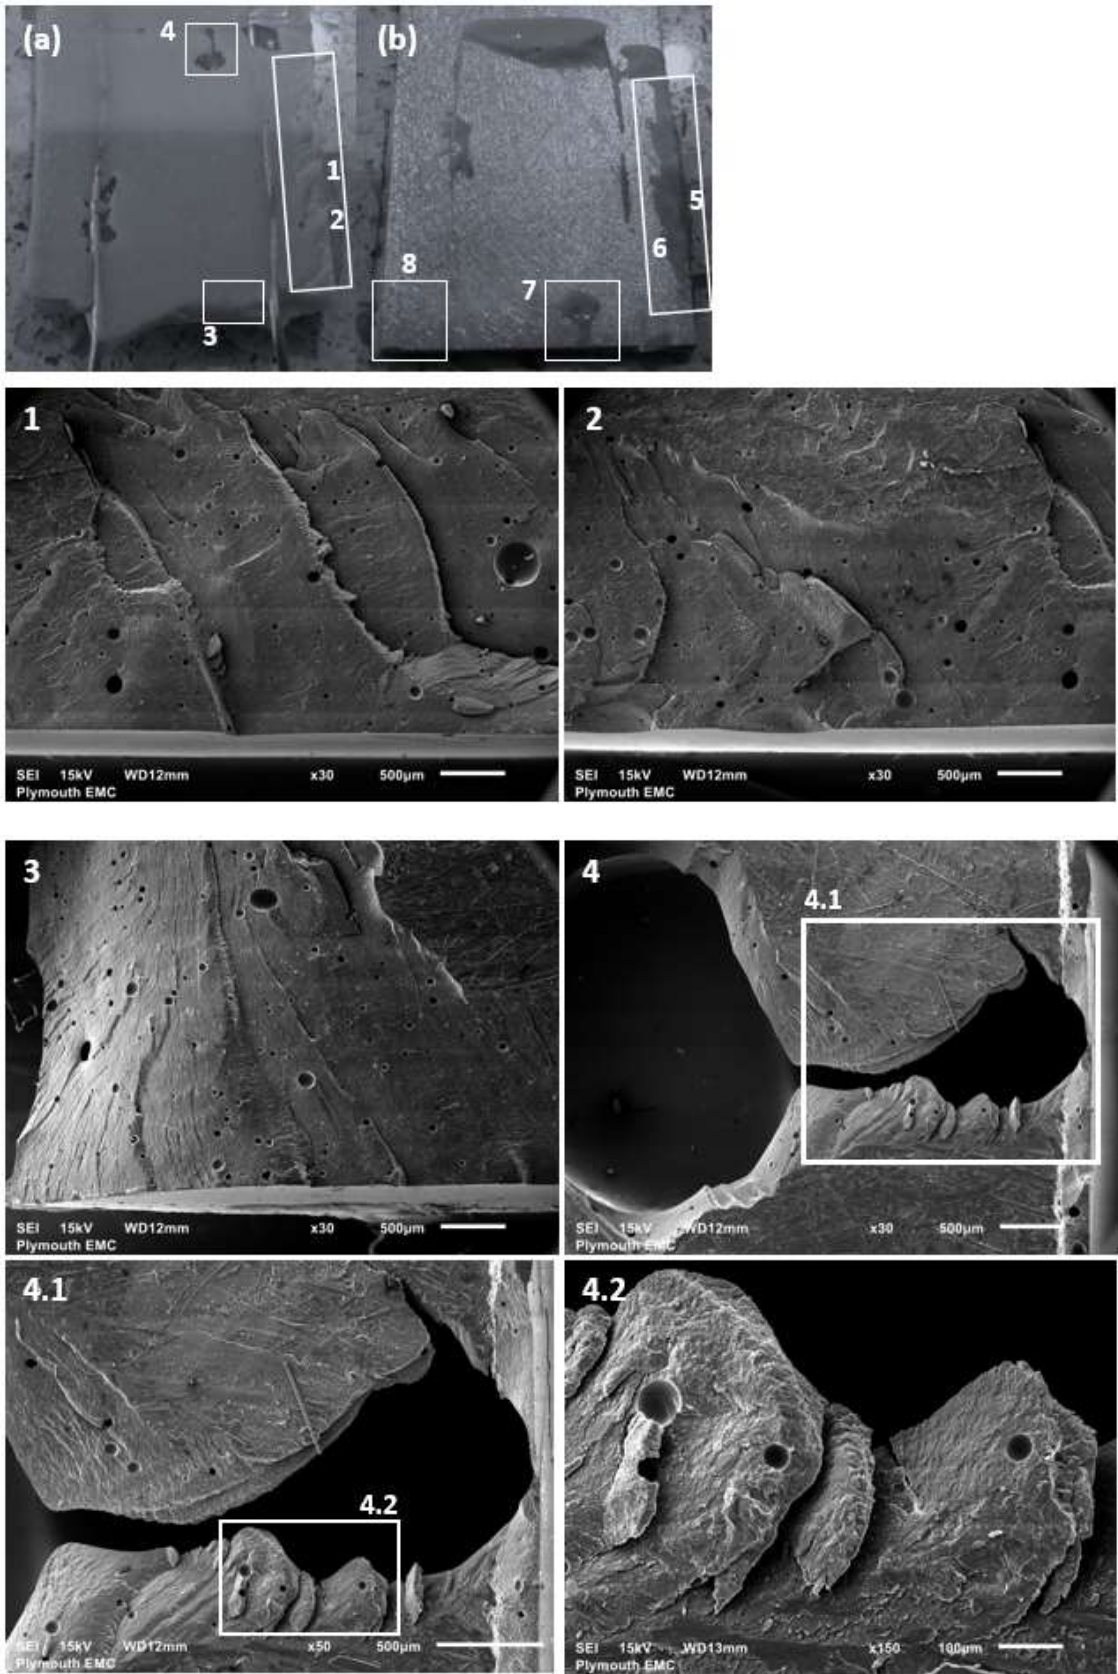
Showing the typical fracture surfaces mounted on a specimen stub prior to low-vacuum sputter coating.
